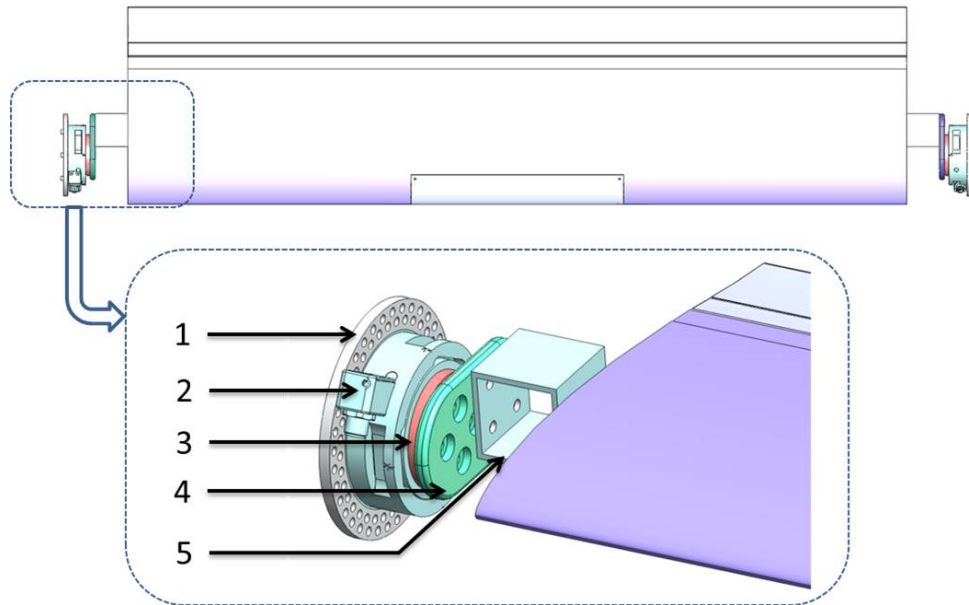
Wing balance sub-assembly. 1. AOA Plate, 2. Balance, 3. Balance interface plate, 4. Offset plate, 5. Wing mount tube
